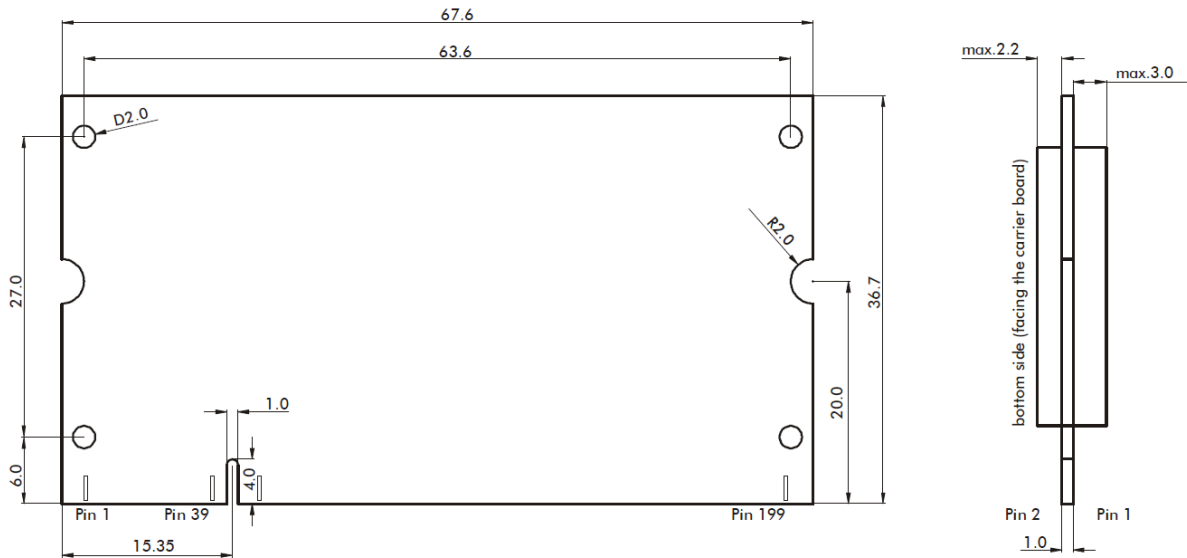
Mechanical dimensions of the Colibri module (top view)
